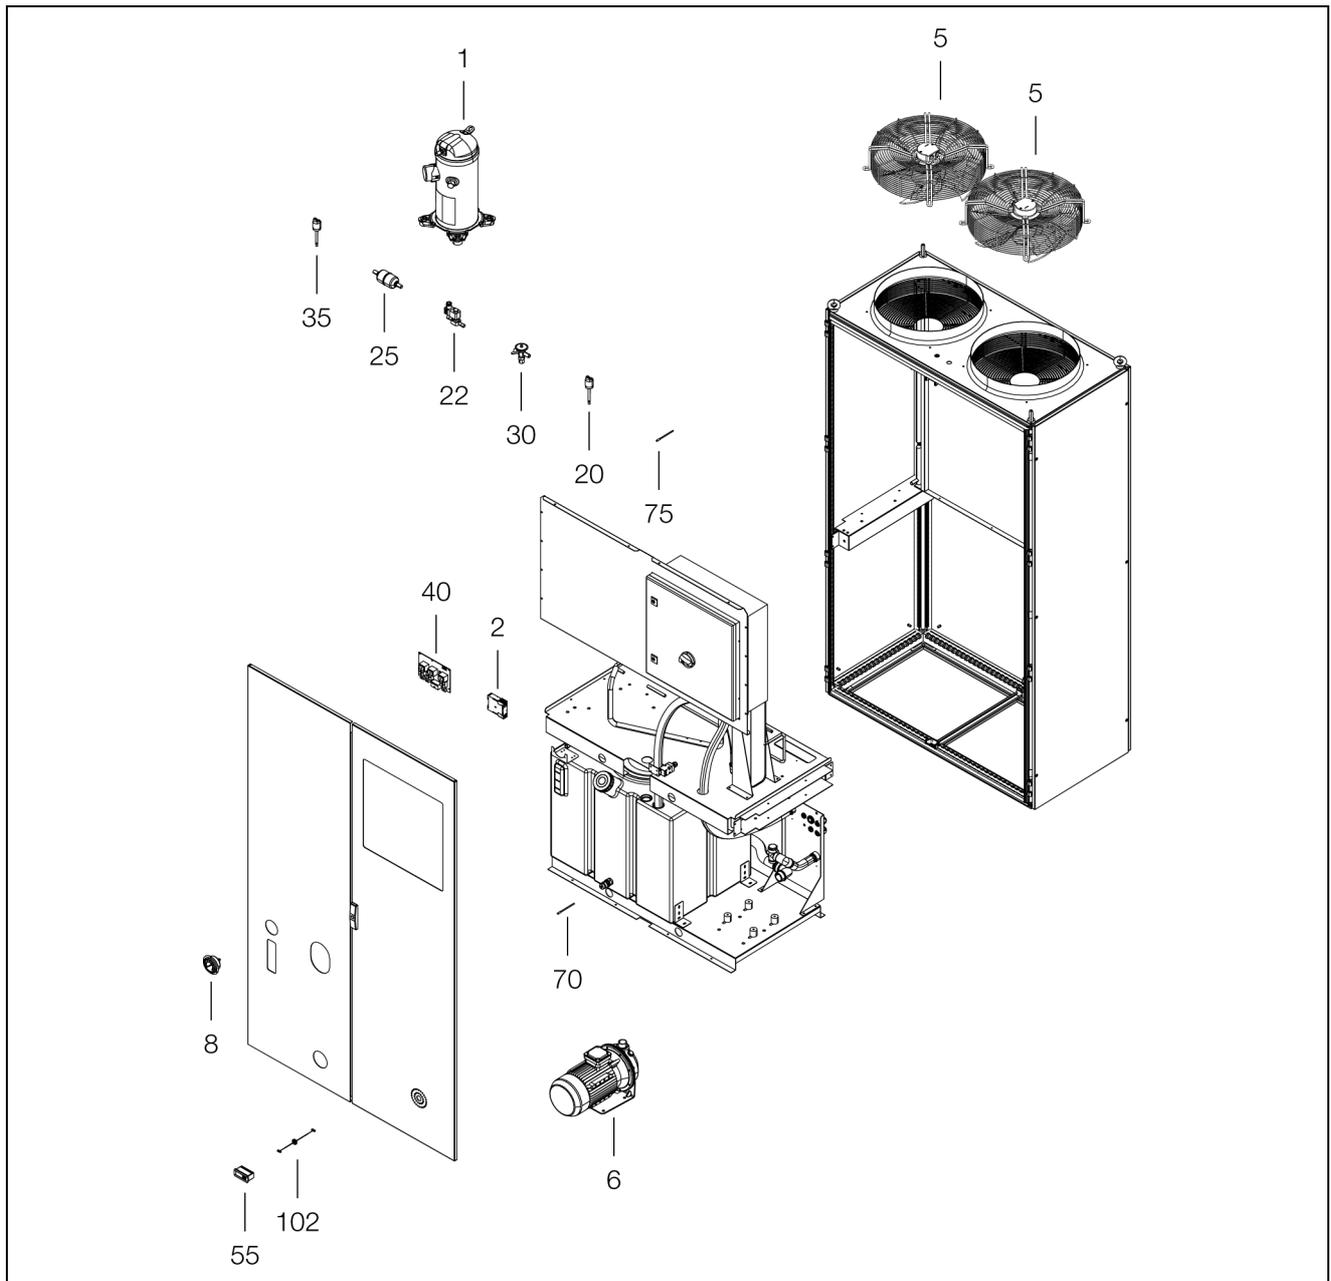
Spare parts drawing for types 3335.860 and 3335.870
